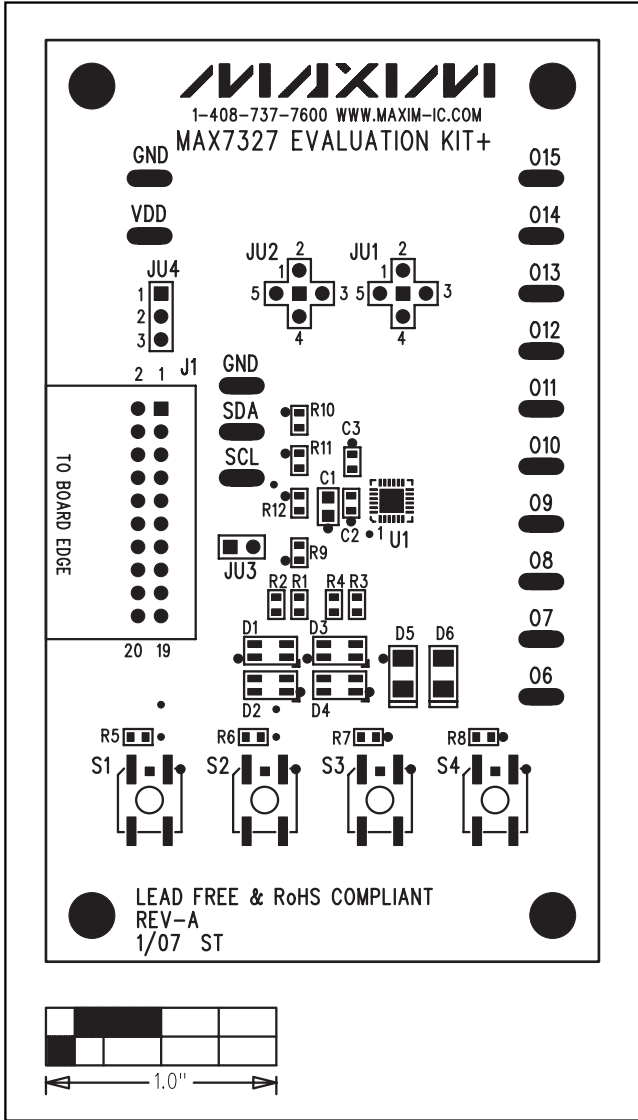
MAX7327 EV Kit Component Placement Guide—Component Side
